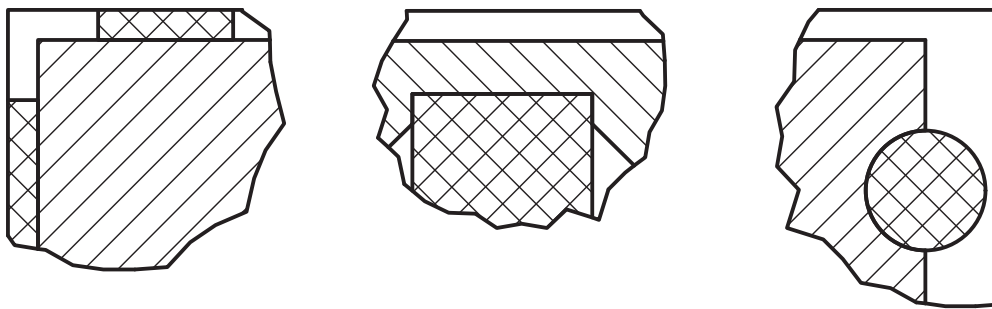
Concepts for nozzle layer alignment: machined edges on sides (left), around the internal heat exchanger geometry (middle) and by using dowel pins / shoulder bolts (right). Cross hatched sections indicate the aligning bodies, and single hatched sections the nozzle profile.
